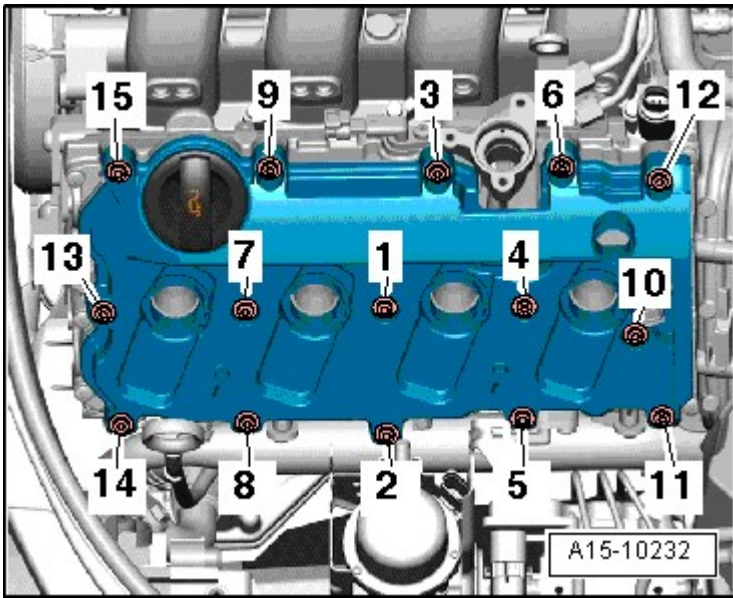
Identifying Left Cylinder Head Cover Bolts Removal Sequence
